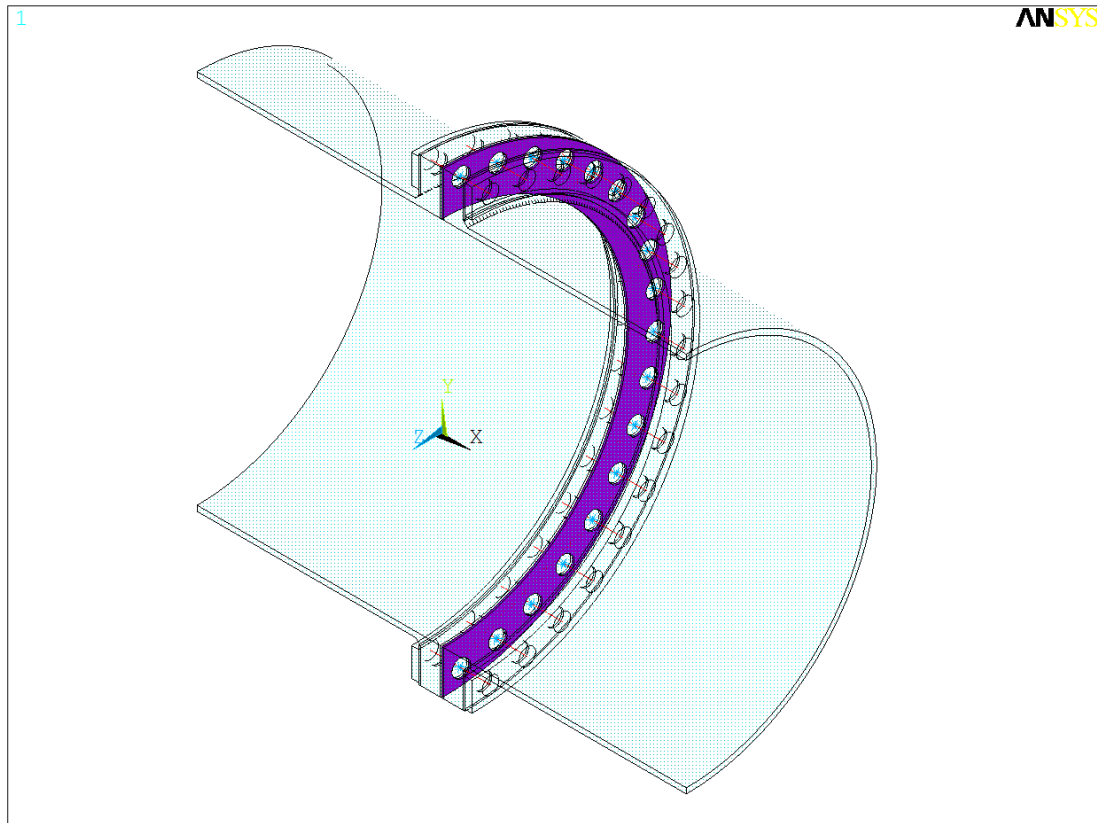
Back to Back Flange Model – 'Frictionless' Contact Definition
